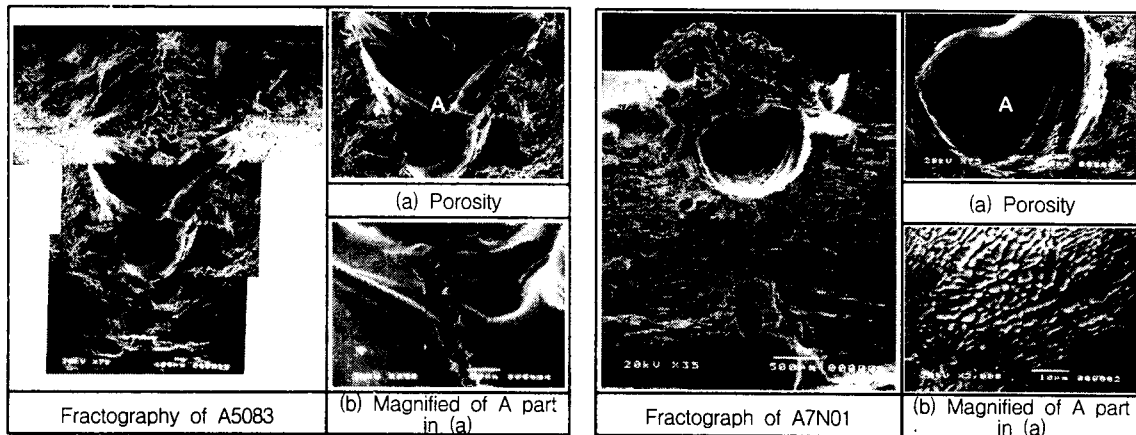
SEM fractographys of weld fusion zone in A5083 and A7N01 alloy.
